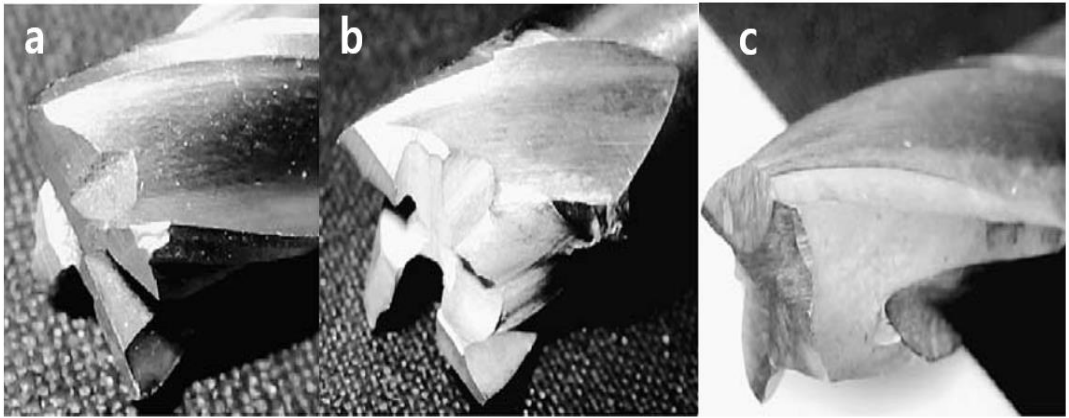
Typical examples of end mill tooth breakage: (a) tip breakage, (b) complete breakage of a single tooth, (c) two teeth breakage. [11]
